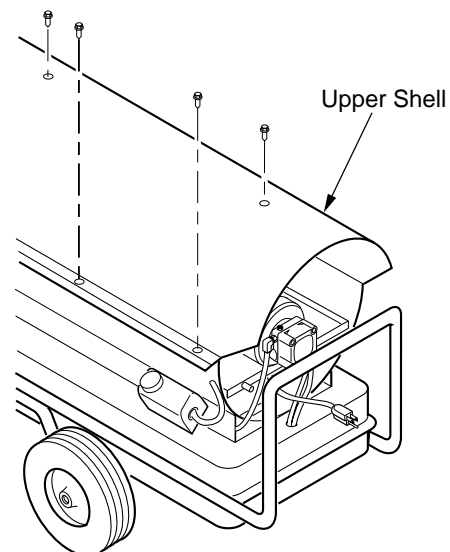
Upper Shell Removal, 600,000 Btu/Hr Model
